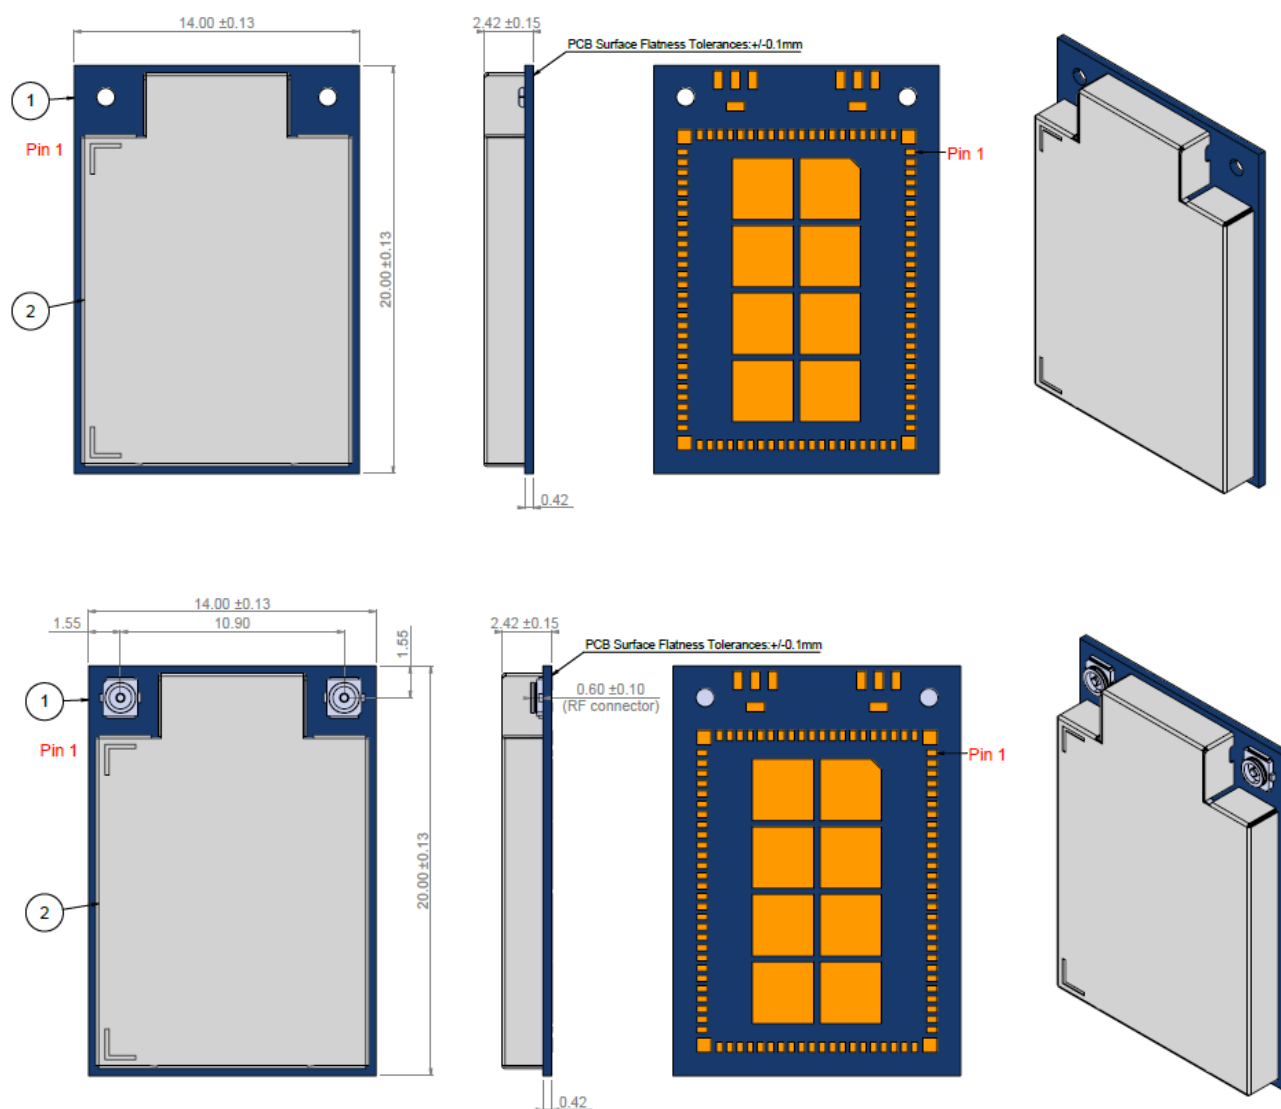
Mechanical dimensions for the Sona MT320 M.2 1420 module
